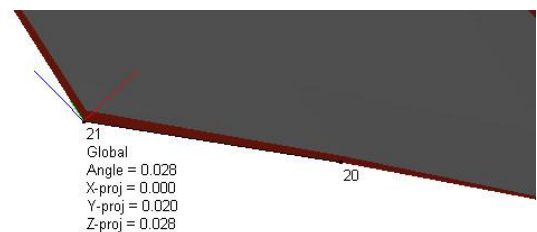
springback angle 0.028° for sheet thickness 3.3 mm
